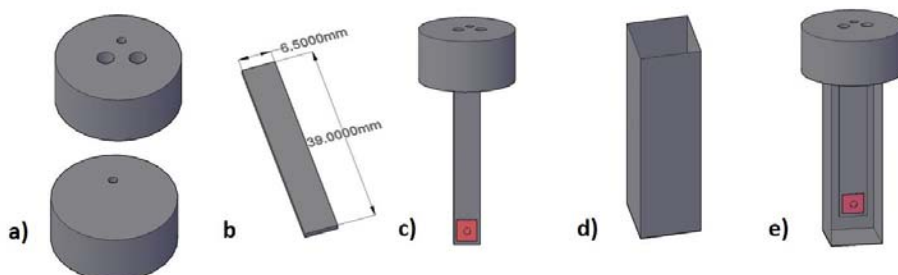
Steel cap sensor holder. a) Steel cap top and bottom view b) Previously cut glass slide as sensor holder c) Steel cap attached with the sensor holder and the sensor d) Empty cuvette e) Steel cap sensor holder inserted inside cuvette.
